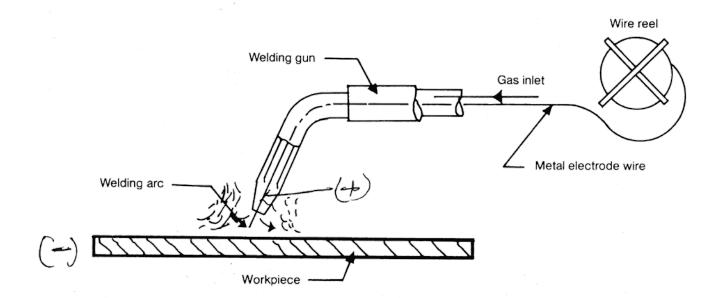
GAS-METAL-ARC WELDING PROCESS
